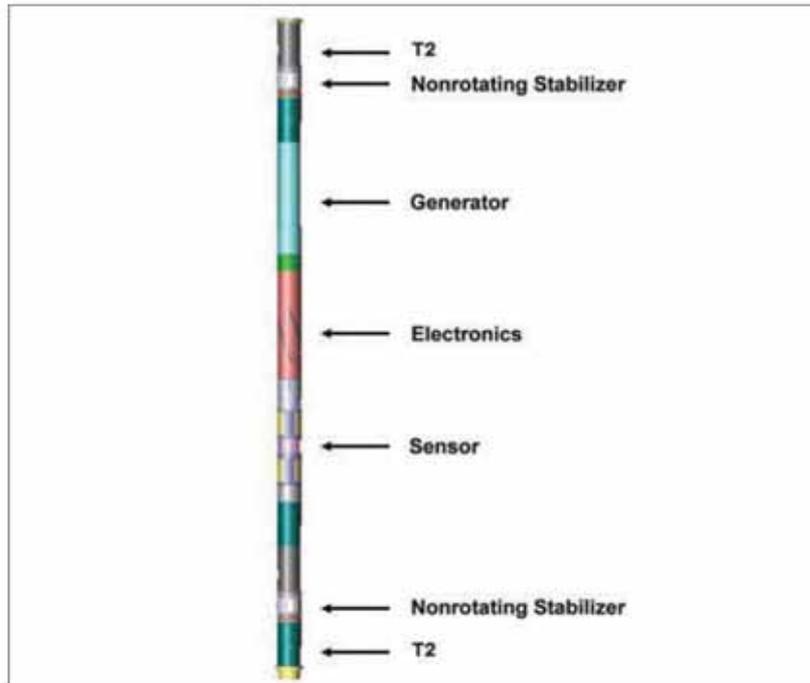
A 4³/₄" NMR LWD tool assembly for 5⁷/₈" and 6¹/₈" hole applications.
